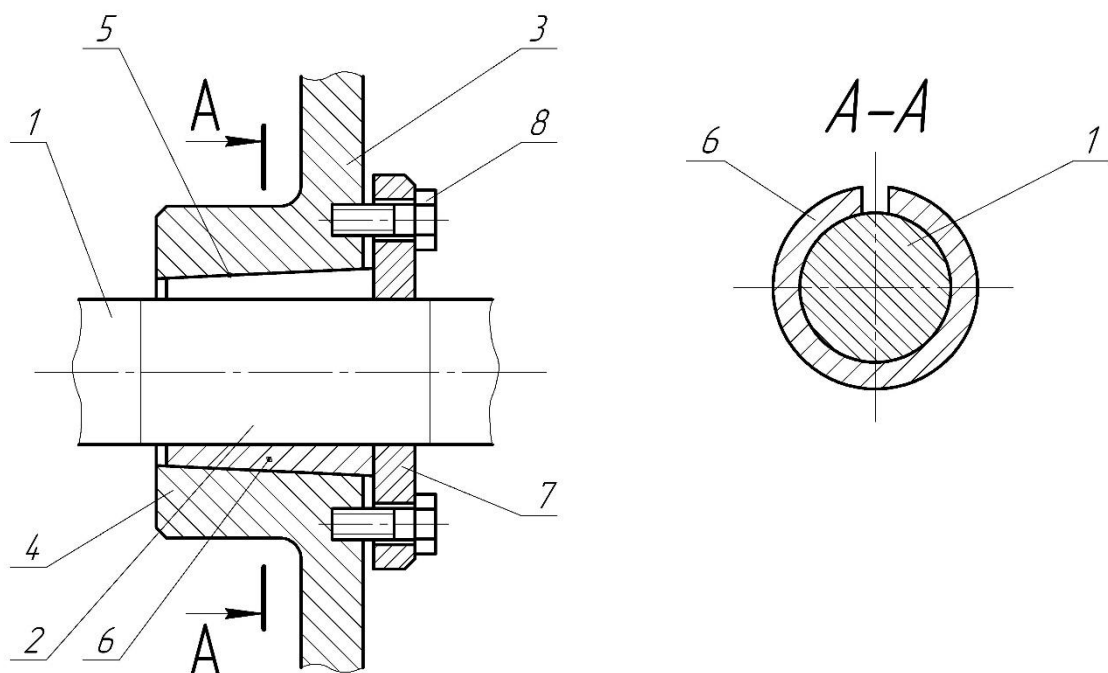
Keyless connection of a part to a shaft (proposed design)
